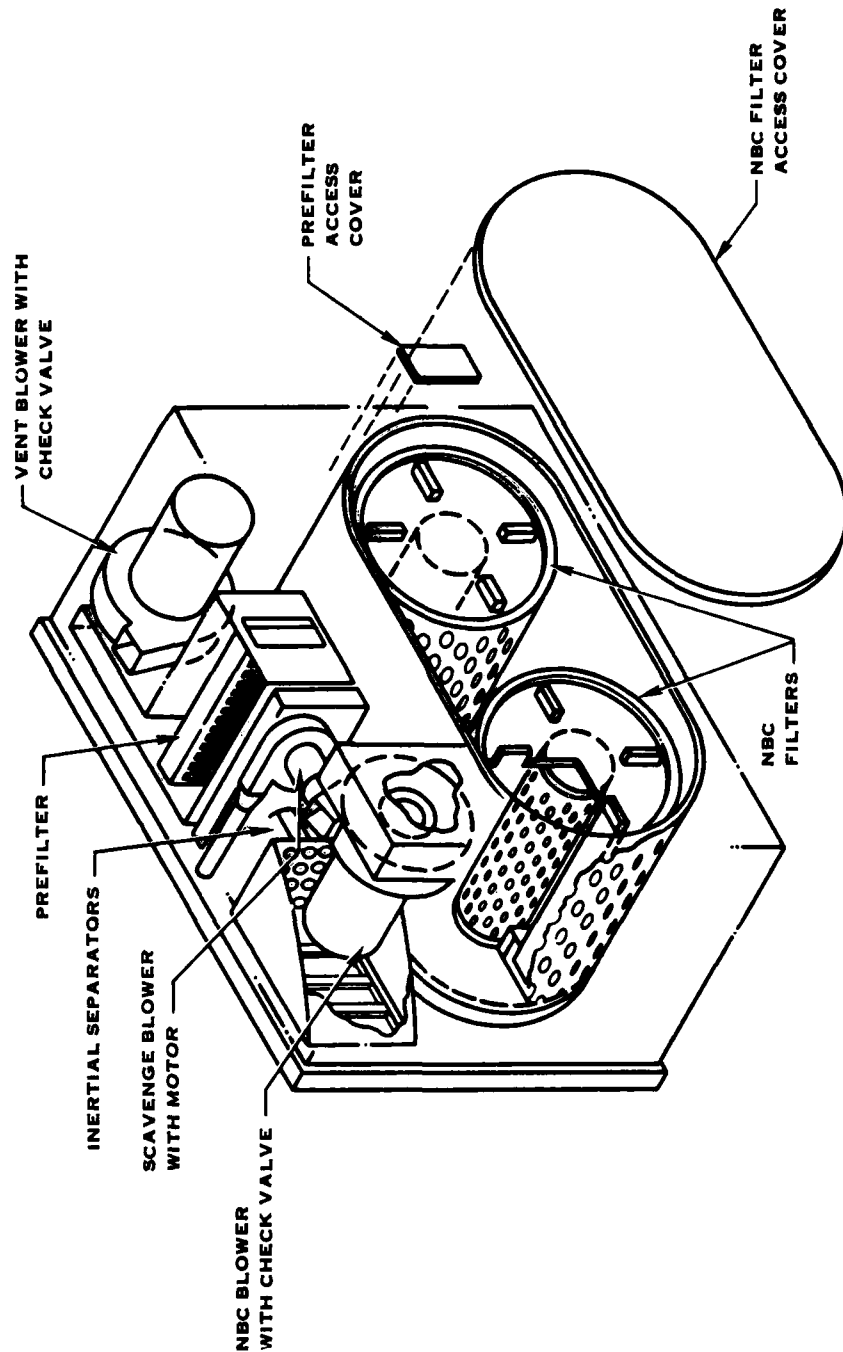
BASELINE FILTER - BLOWER PACK
